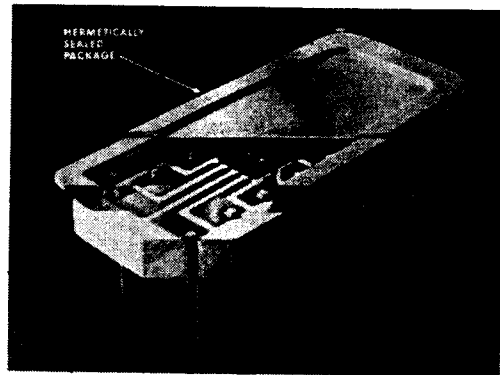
Hermetically sealed sixteen-pin dual in-line package.
